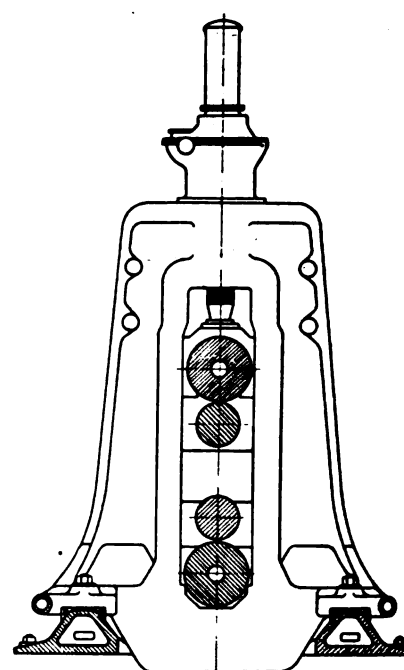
New 204" reversing plate mill being built by the United Engineering & Foundry Company.
